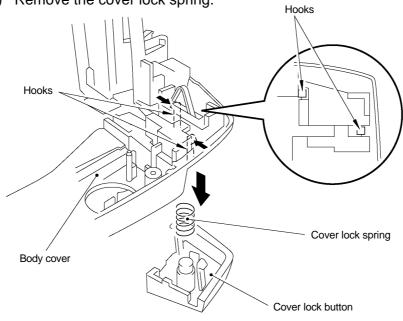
Removing the Sub PCB Assy and the Button
